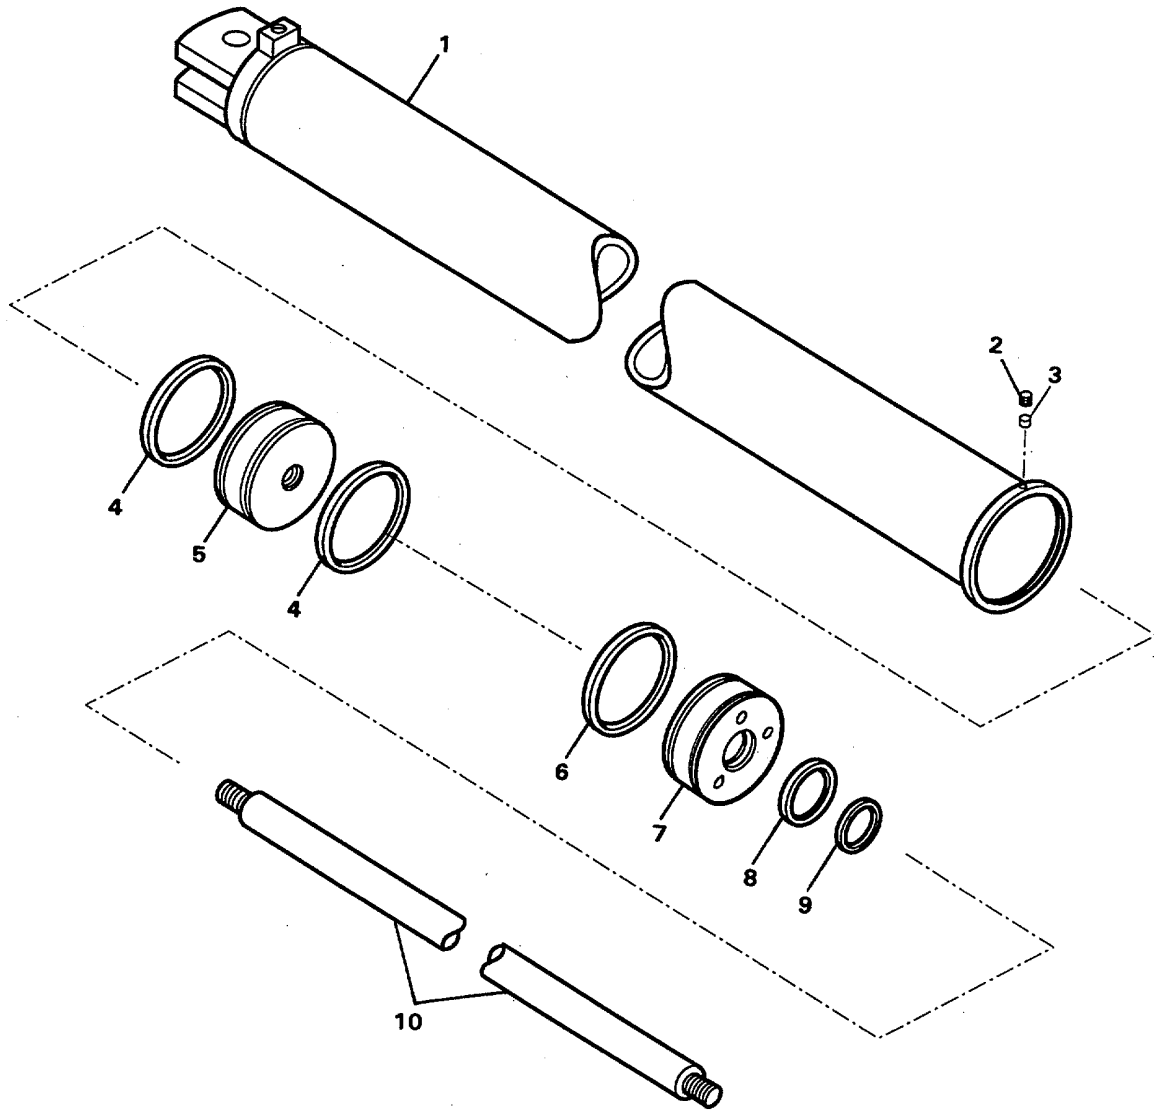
Ladder Extension Hydraulic Cylinder-Rear
